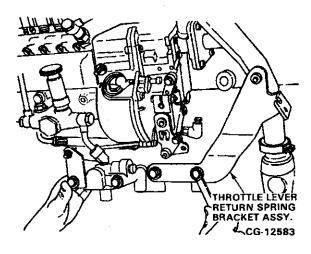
Install Throttle Lever Return Spring Bracket (Early Production)
